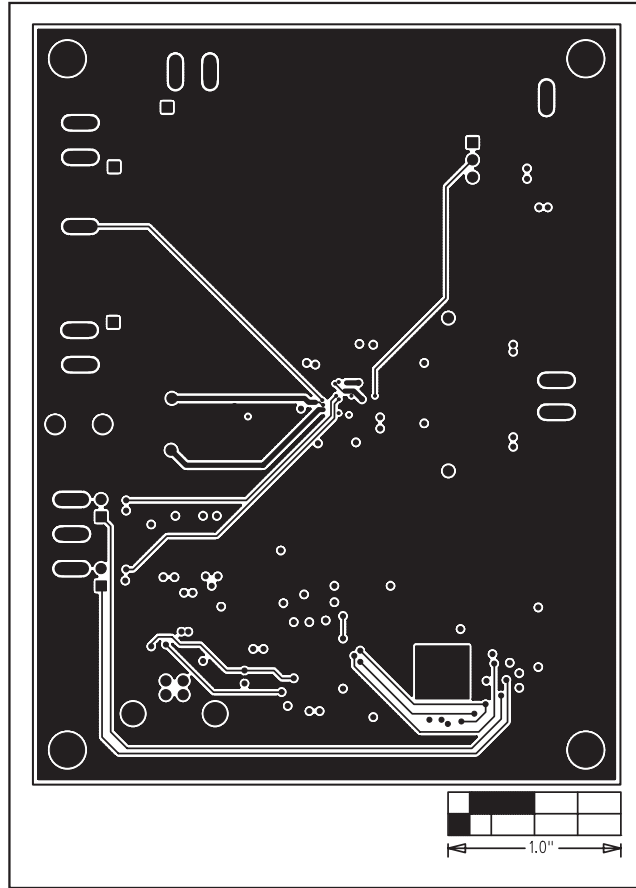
MAX9796 EV Kit PCB Layout—Solder Side
